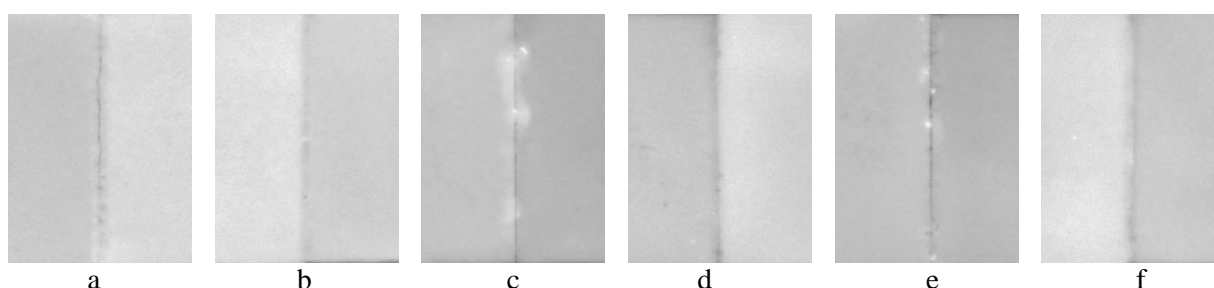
Radiographic images of dissimilar welded samples: a. microplasma welded without filling material; b. laser welded without filling material; c. microplasma welded with Co-Cr filling material; d. laser welded with Co-Cr filling material; e. microplasma welded with Ni-Cr filling material; f. laser welded with Ni-Cr filling material.
